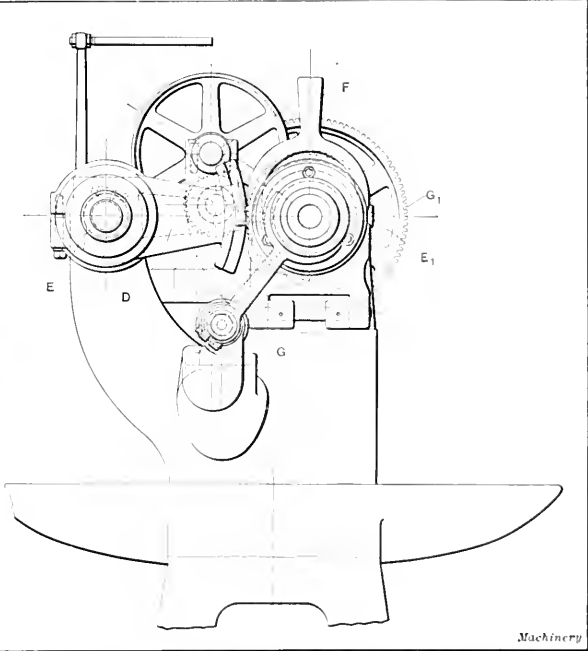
End Elevation showing Chuck Closing and Stock Feeding Mechanism
